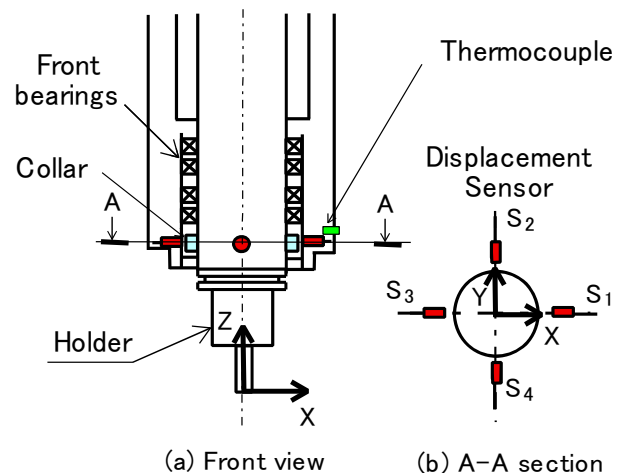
Spindle-integrated displacement sensor configuration for determining cutting force [28].
